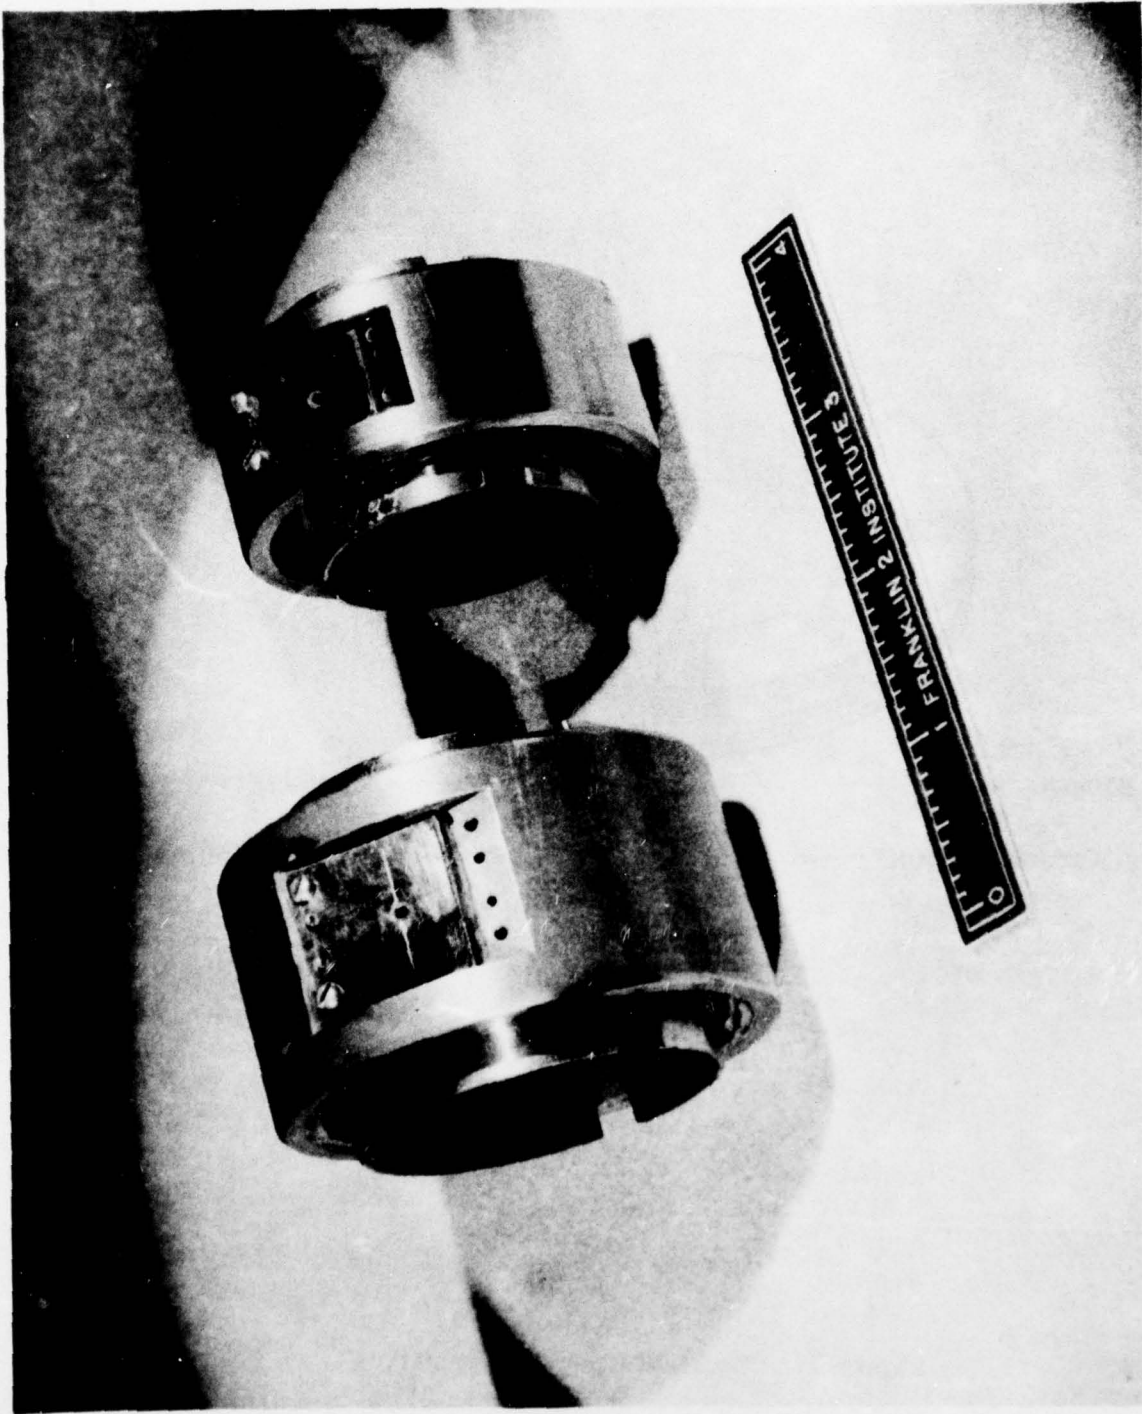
Spring-Mounted, Compliant-Pivot Journal Bearing Assemblies
